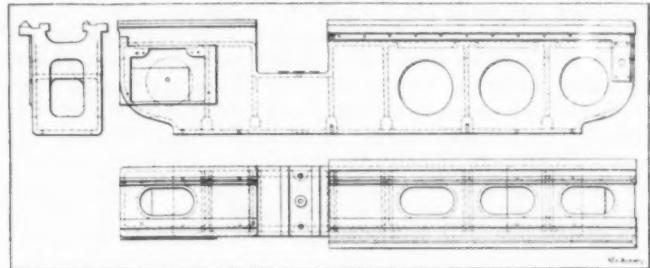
DETAILS OF BED OF THE BUCKMAN LATHE
